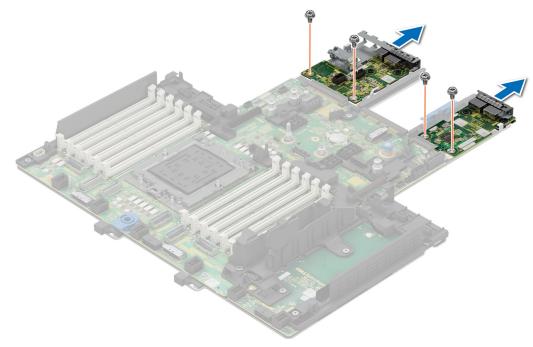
Removing the LOM card and liquid cooling rear I/O board
